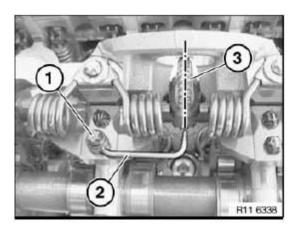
Identifying Special Tool (11 4 270) And Steel Screw Courtesy of BMW OF NORTH AMERICA, INC.
